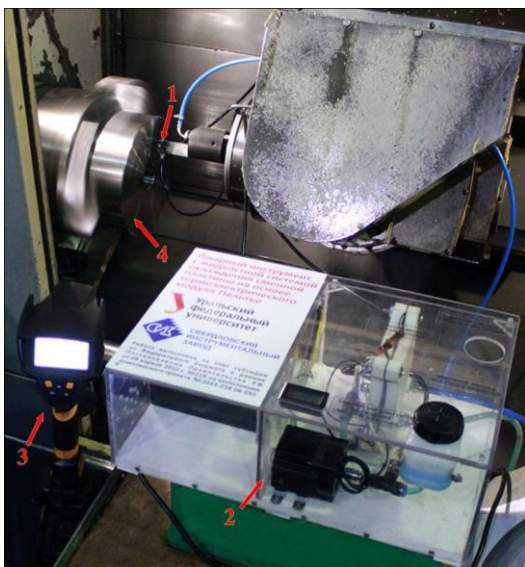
Cutter with closed cooling system for replacement plate on the lathe Okuma Multus B300: 1 - Holder with RCP; 2 - Cooling system; 3 - Thermal imager; 4 - Workpiece
